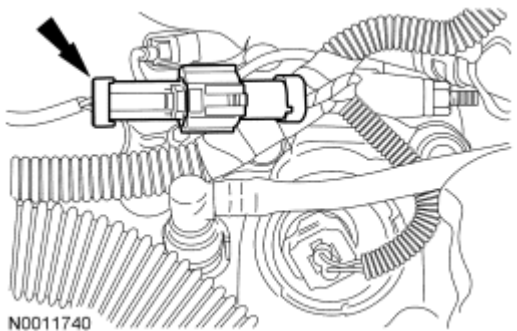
Locating Generator Jumper Harness Electrical Connector
